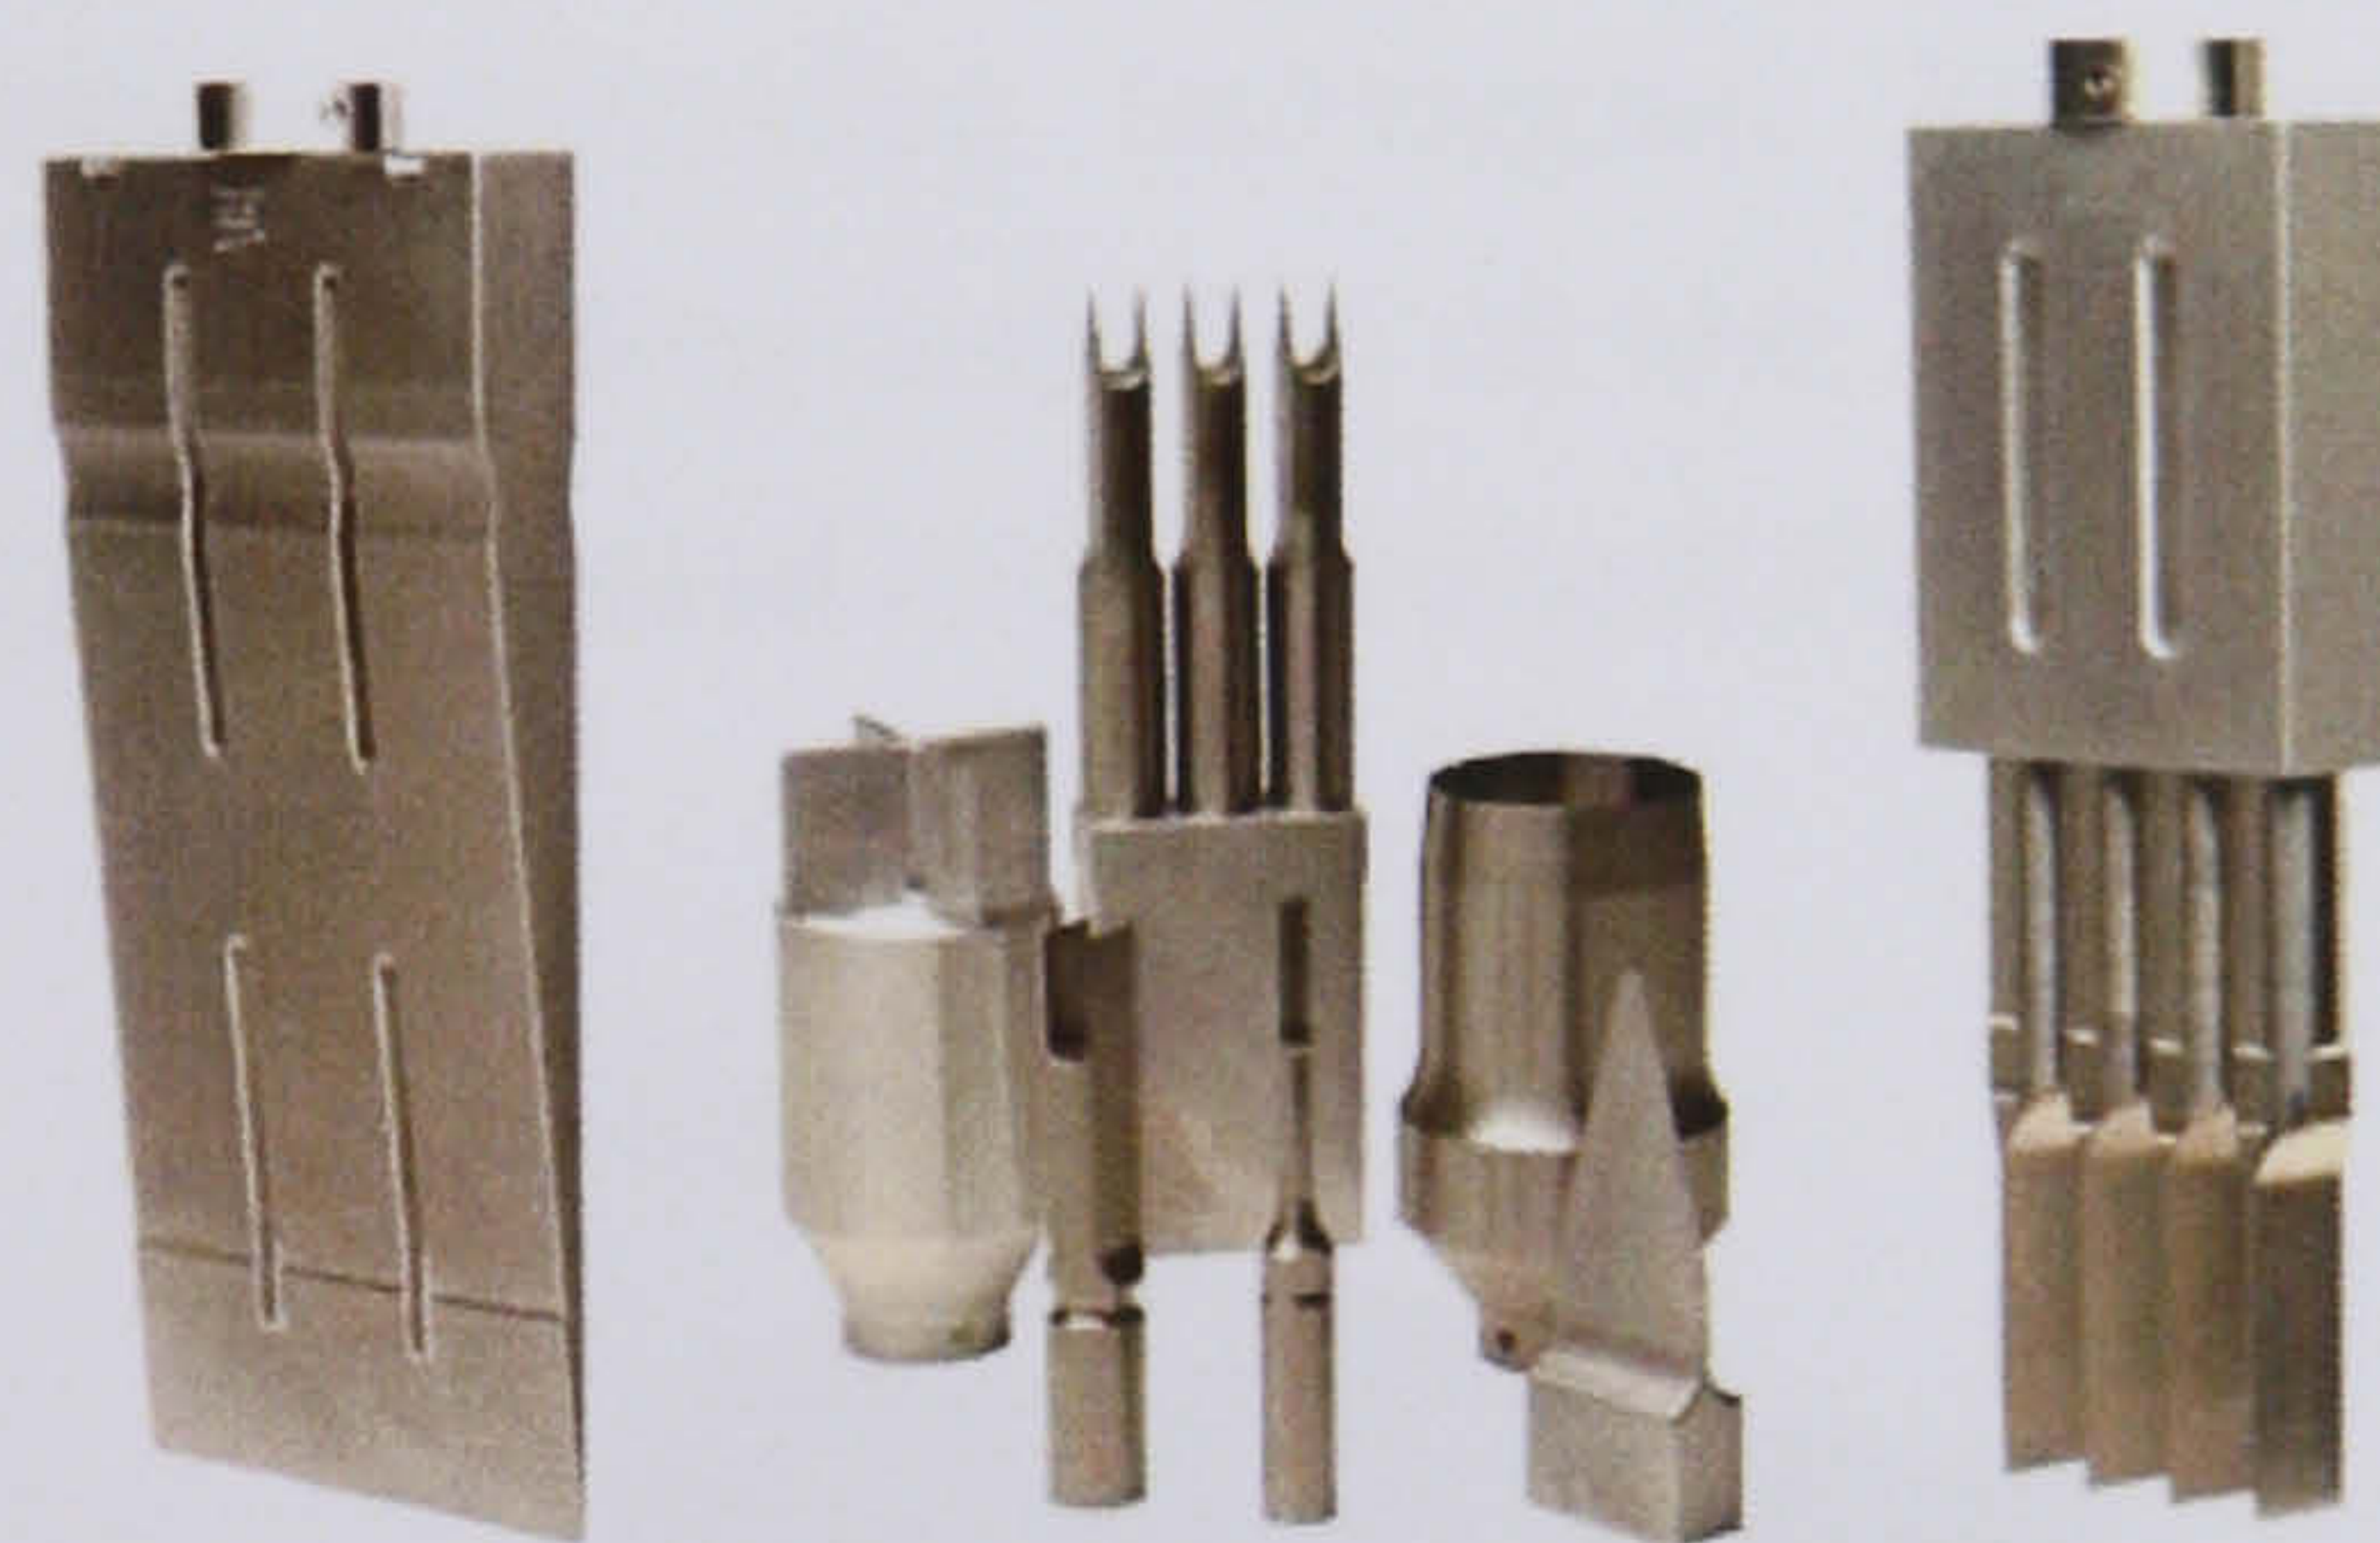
Ultrasonic knives used for guillotine type and slicing type food cutting [6].
